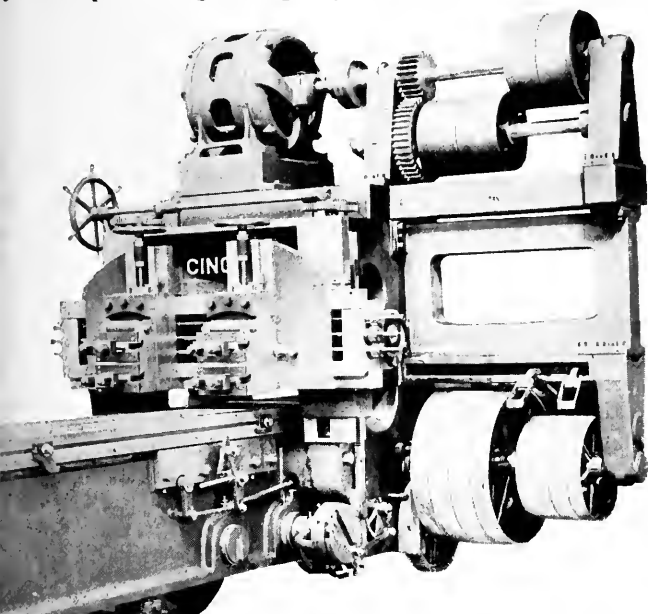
TYPICAL PLANER DRIVEN BY NON-REVERSING MOTOR
